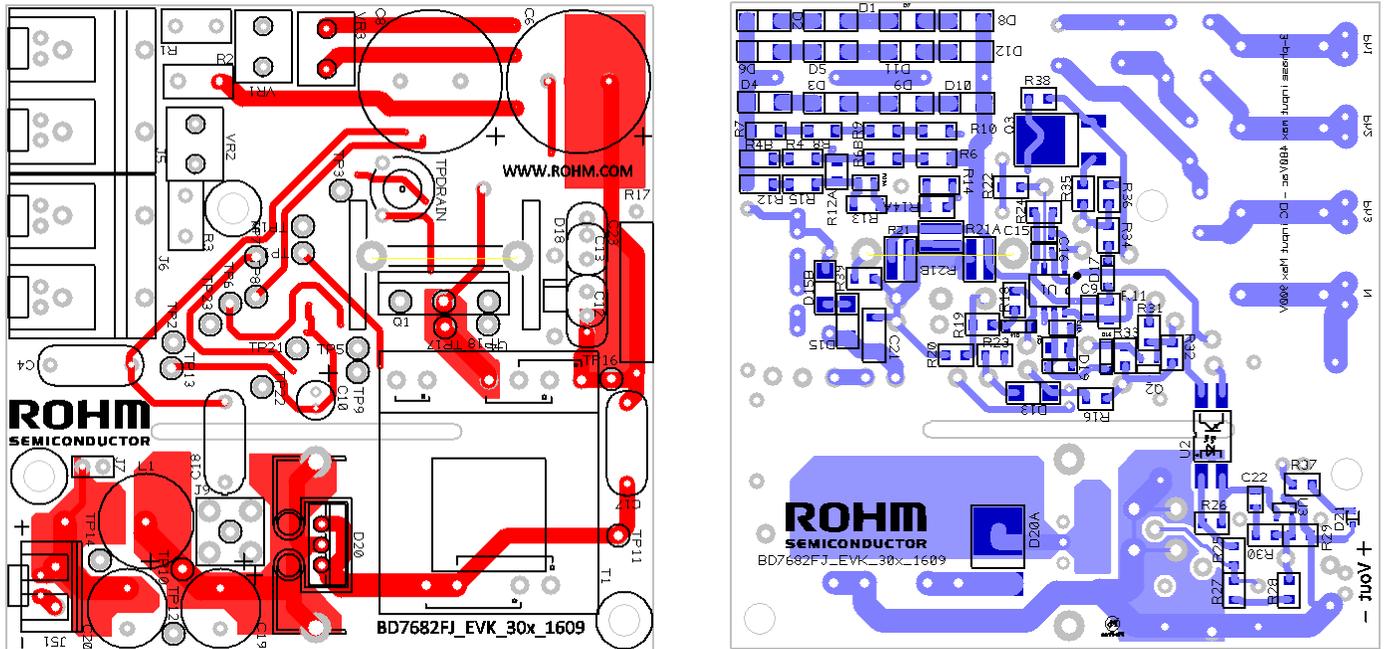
Layout of top side (left) and bottom side (right) of the AUX board.
